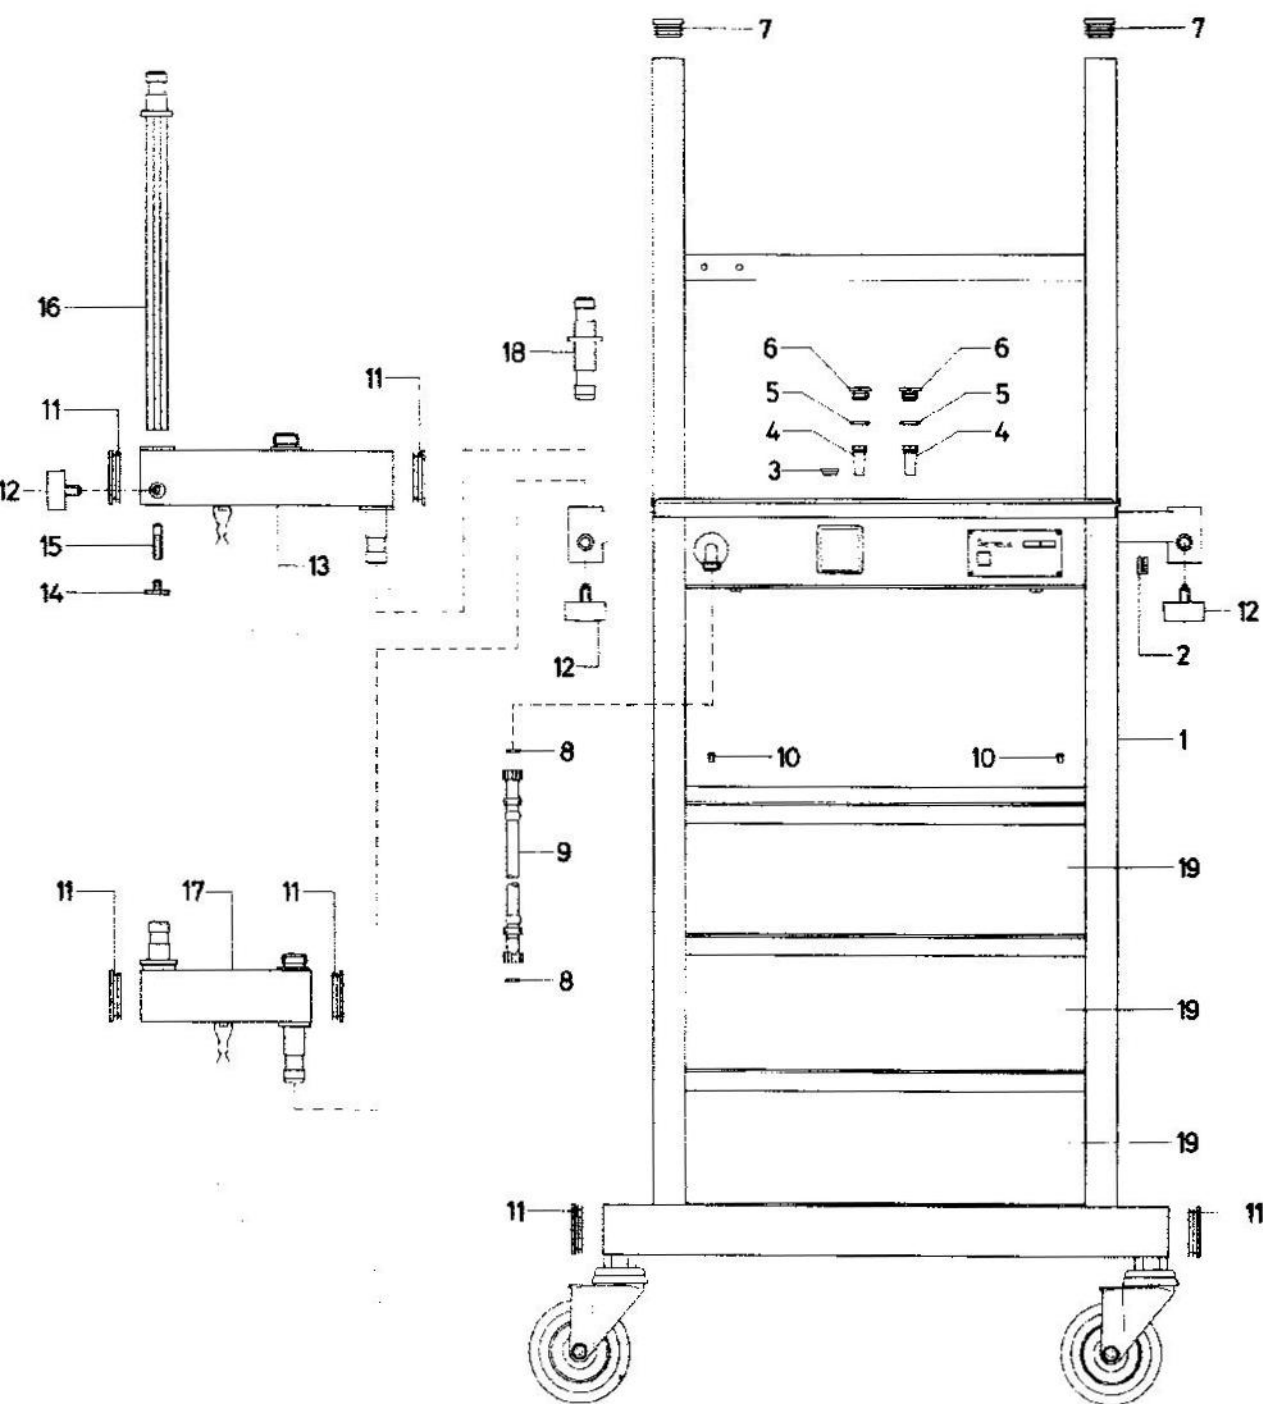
Component parts of SENECA basic unit (rf. to Parts List on page 10).
